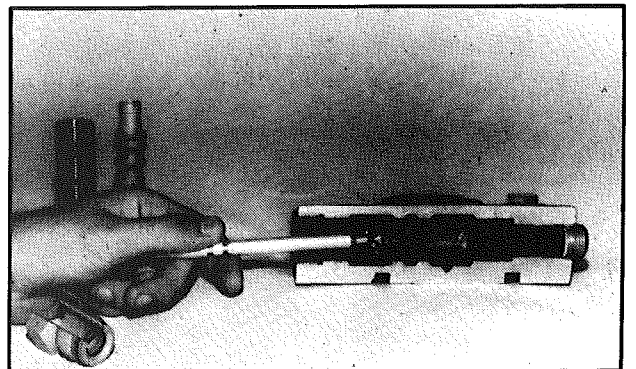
Insert bumper hook thru center of bumper and pull straight out.
